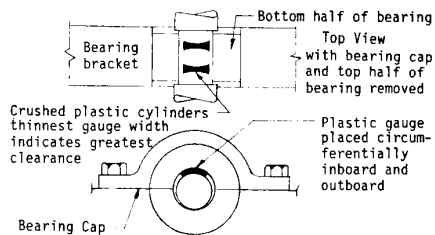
Technique for measurement of shaft journal to bearing bore clearances.
